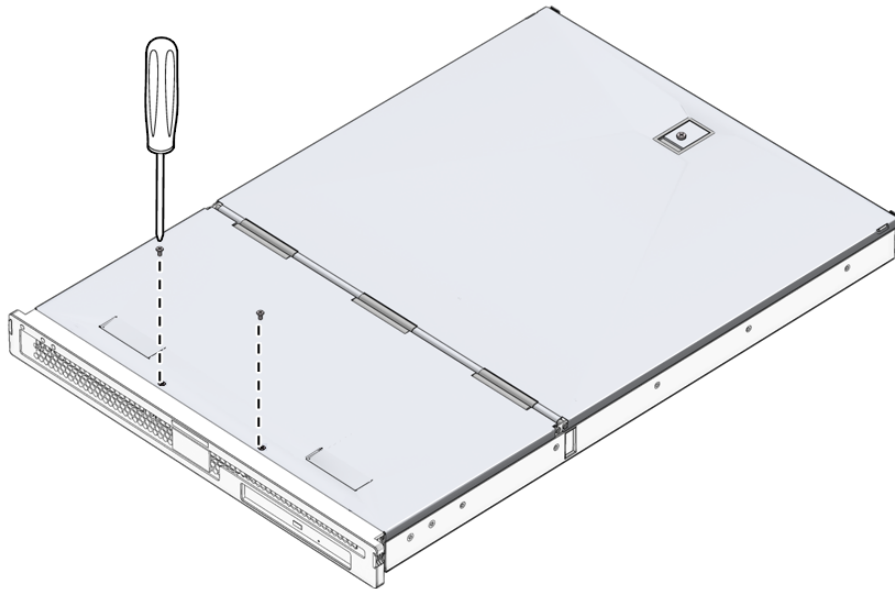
Location of Screws on the Front Section of the Cover
